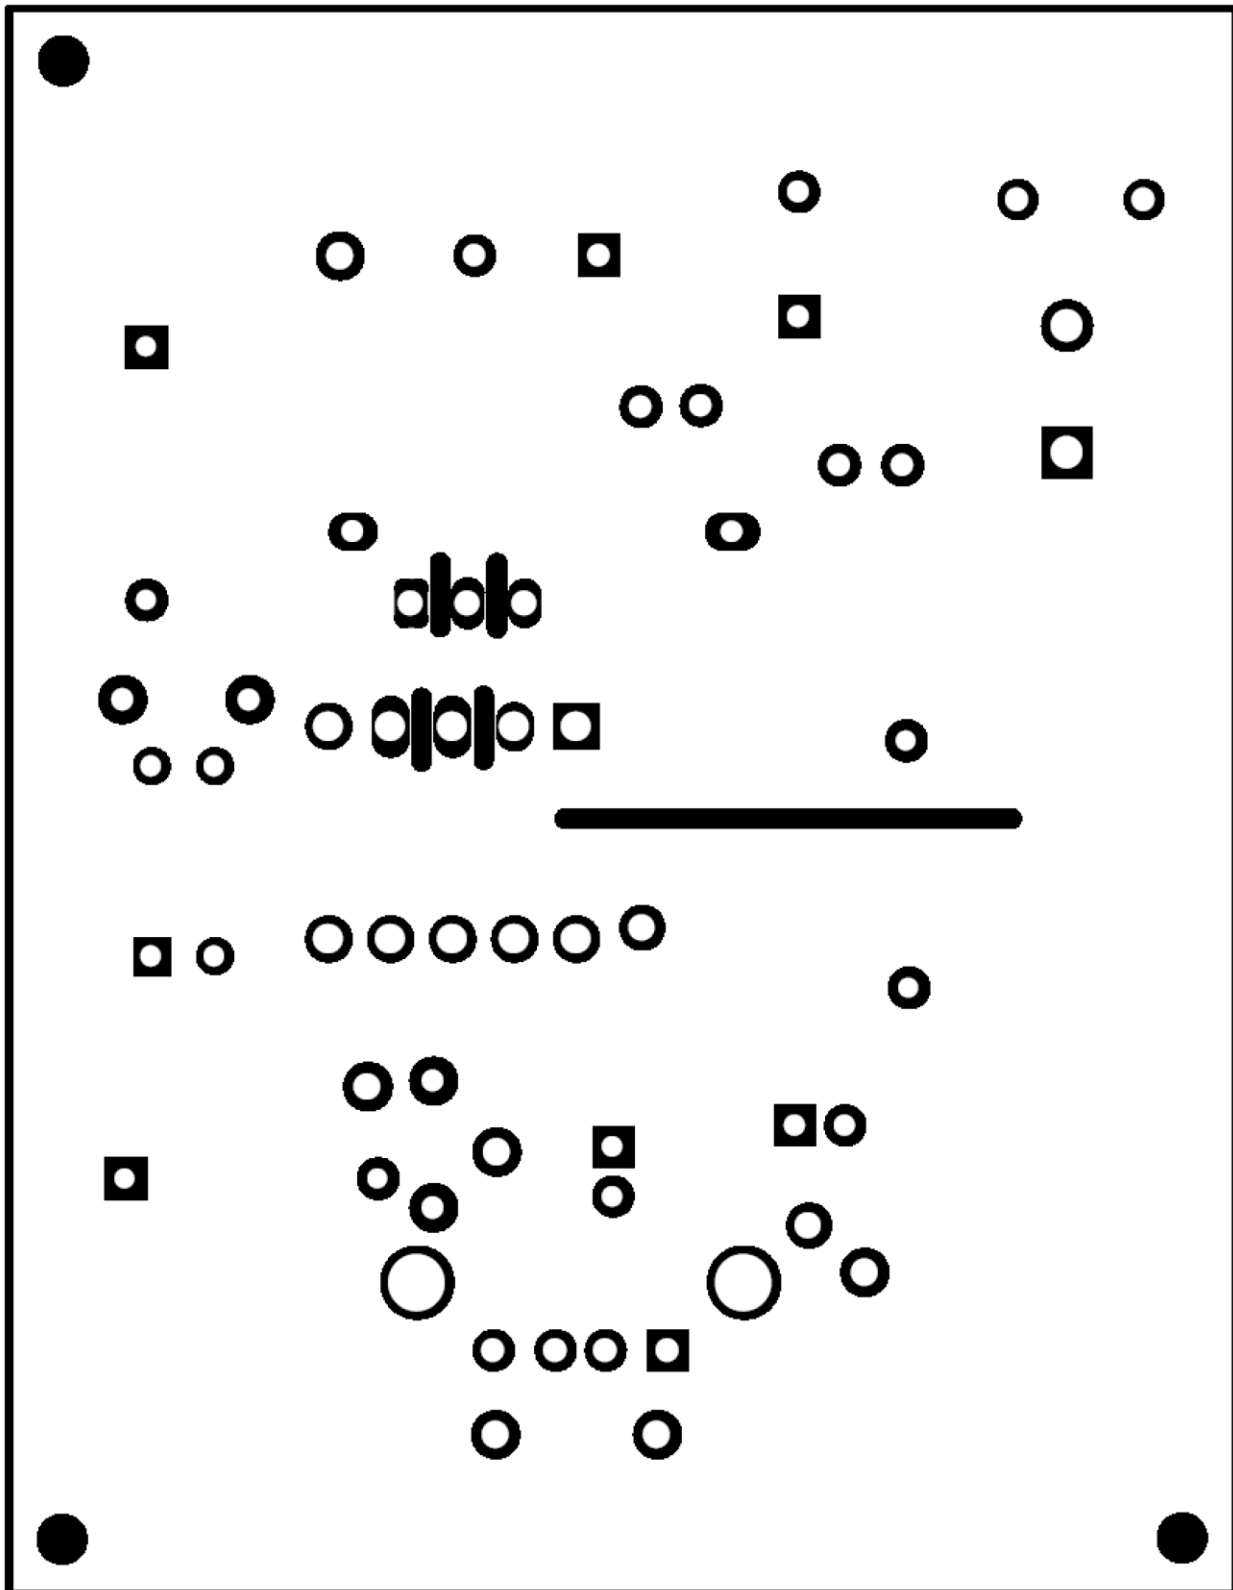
UCC28740EVM-525 Top Copper (Top View)
